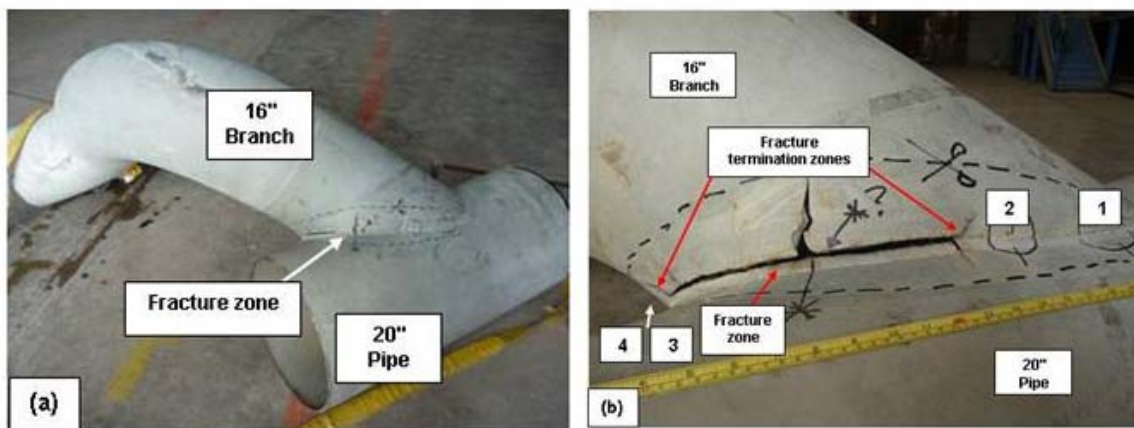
General (a) and enlarged (b) views of fracture zone of the spool. Note that fracture had occurred at sharp angle zone of 16" pipe/20" header assembly, just beside its circumferential weld.
